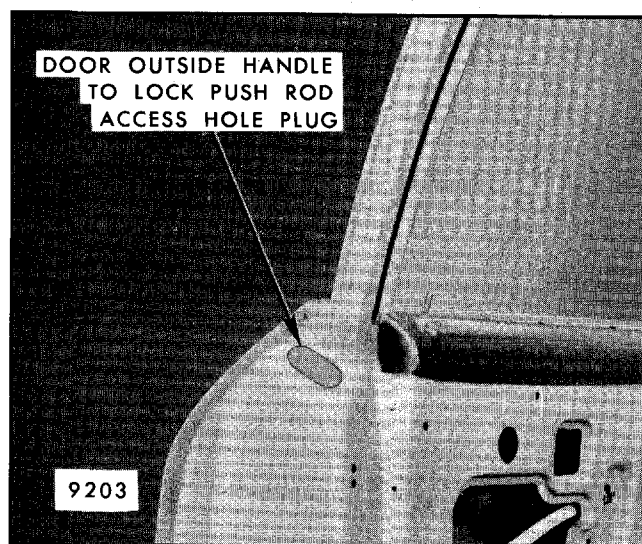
Outside Handle Push Rod Access Hole Plug - "H" Styles
